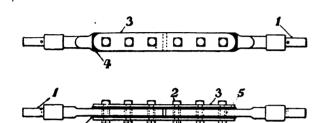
Insulated Joint for Welding into Tie Plates, etc. The Union Switch & Signal Company.
